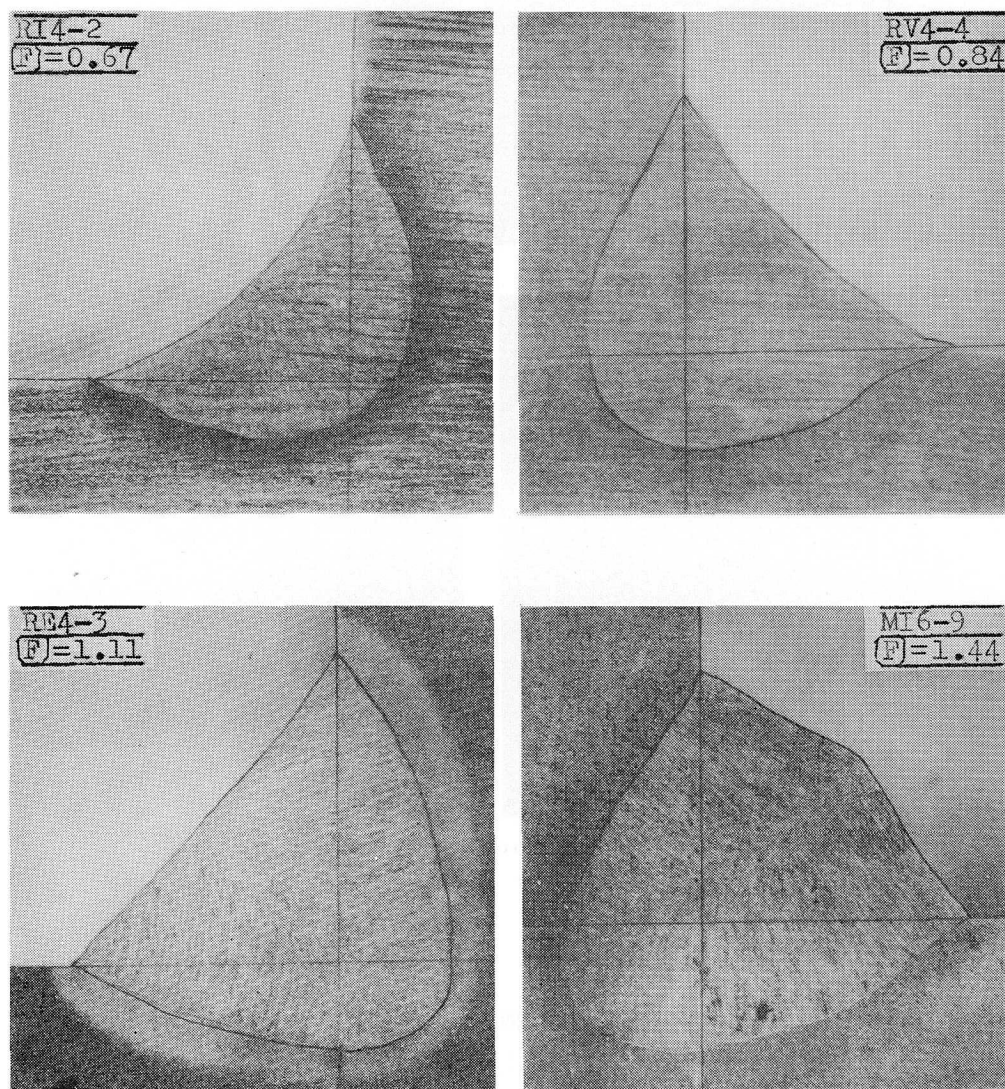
(1) Examples of macro-etching cross-section of fillet weld
